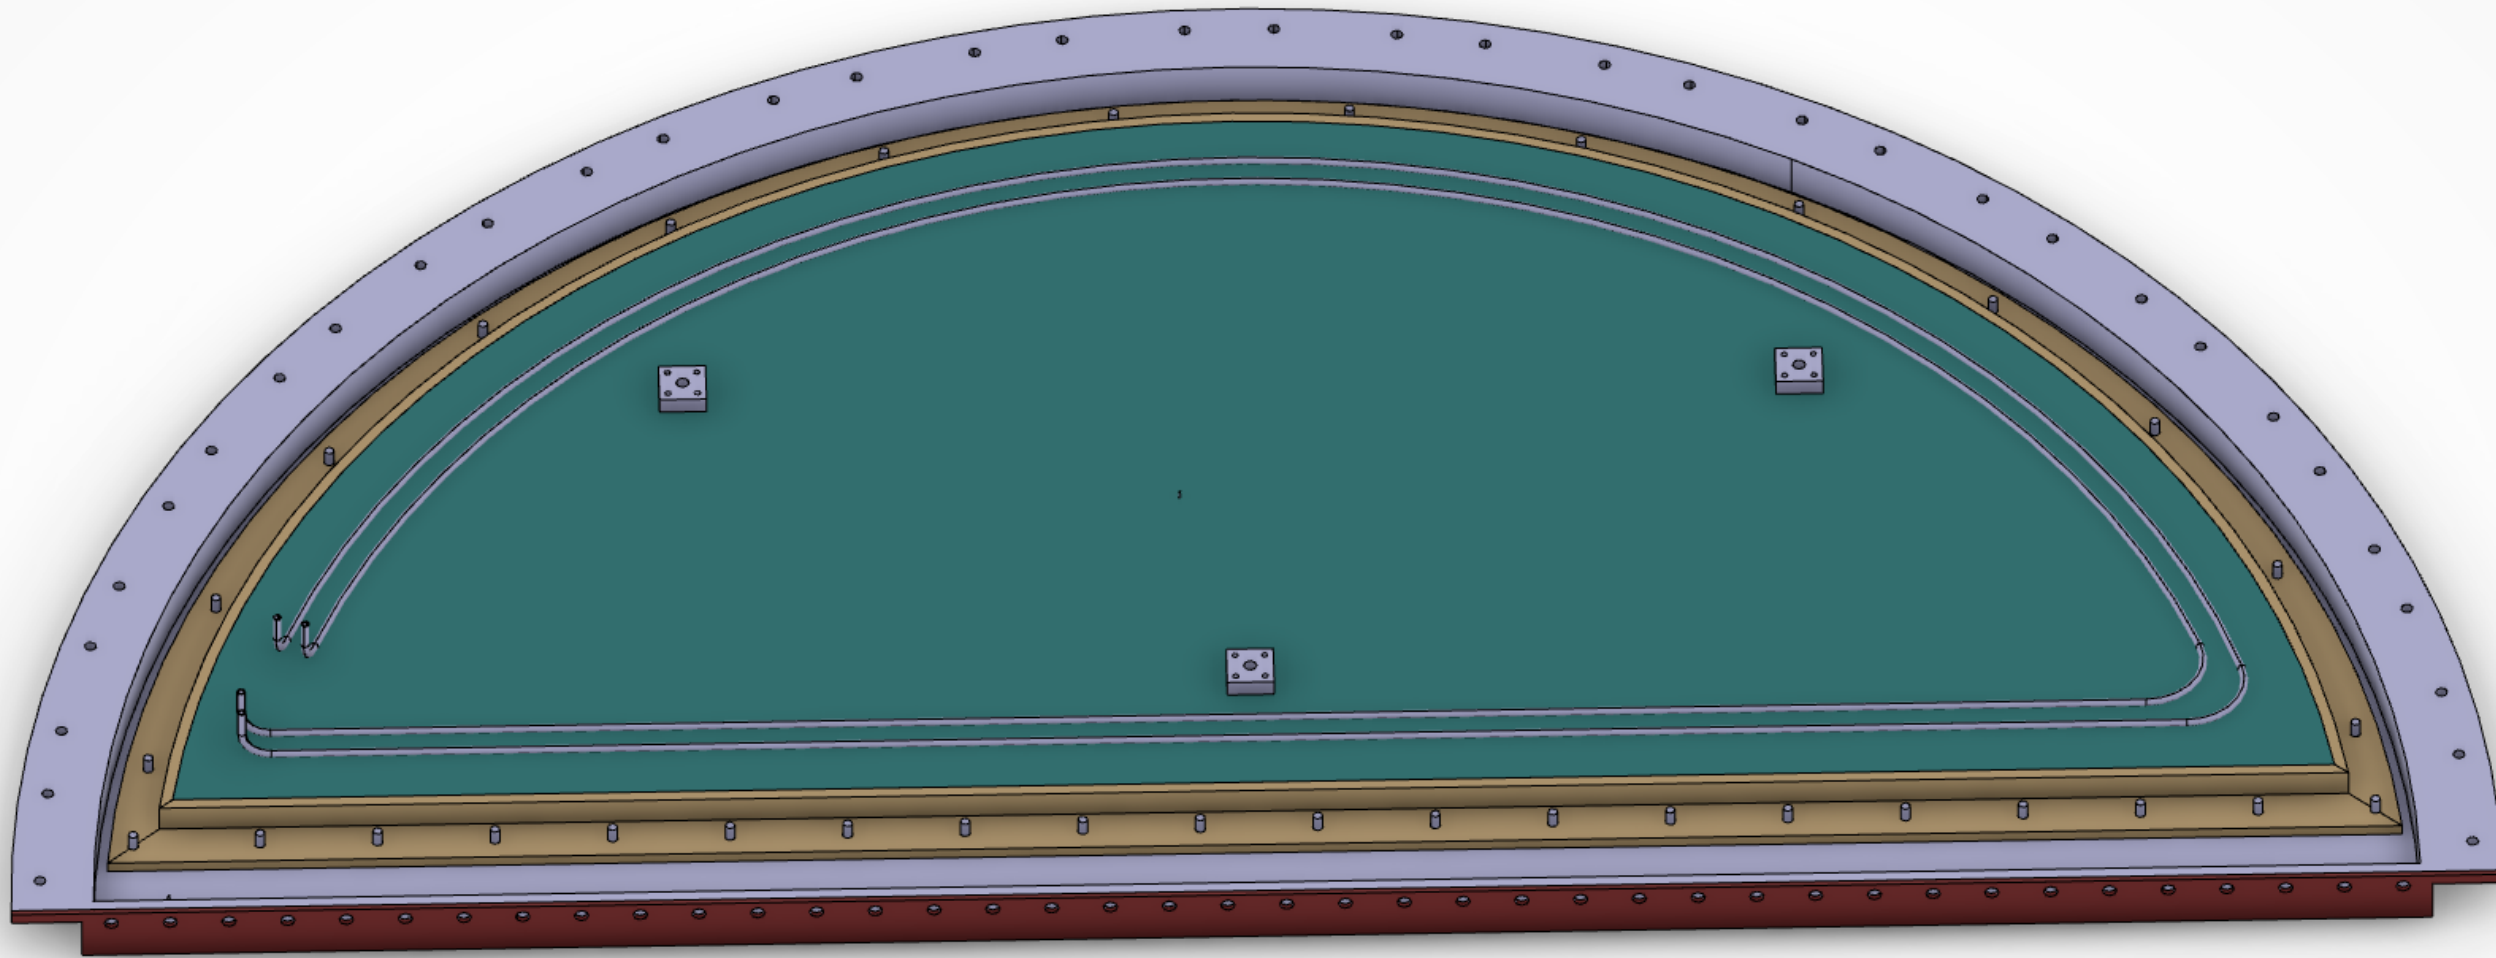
Explode of parts of PF3 Feeder TS Shrouds
